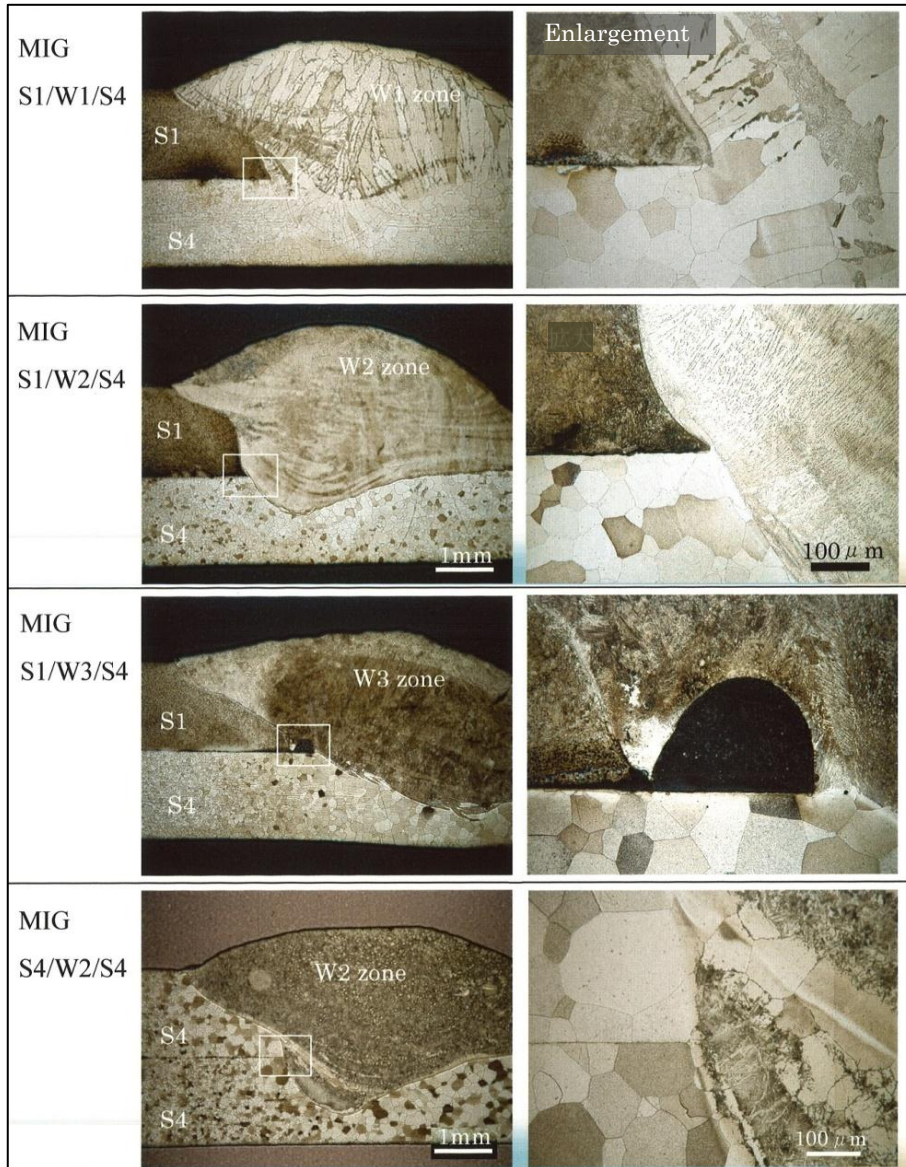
Microstructures of MIG welded joints in sectional view. Right part figures are enlargements
